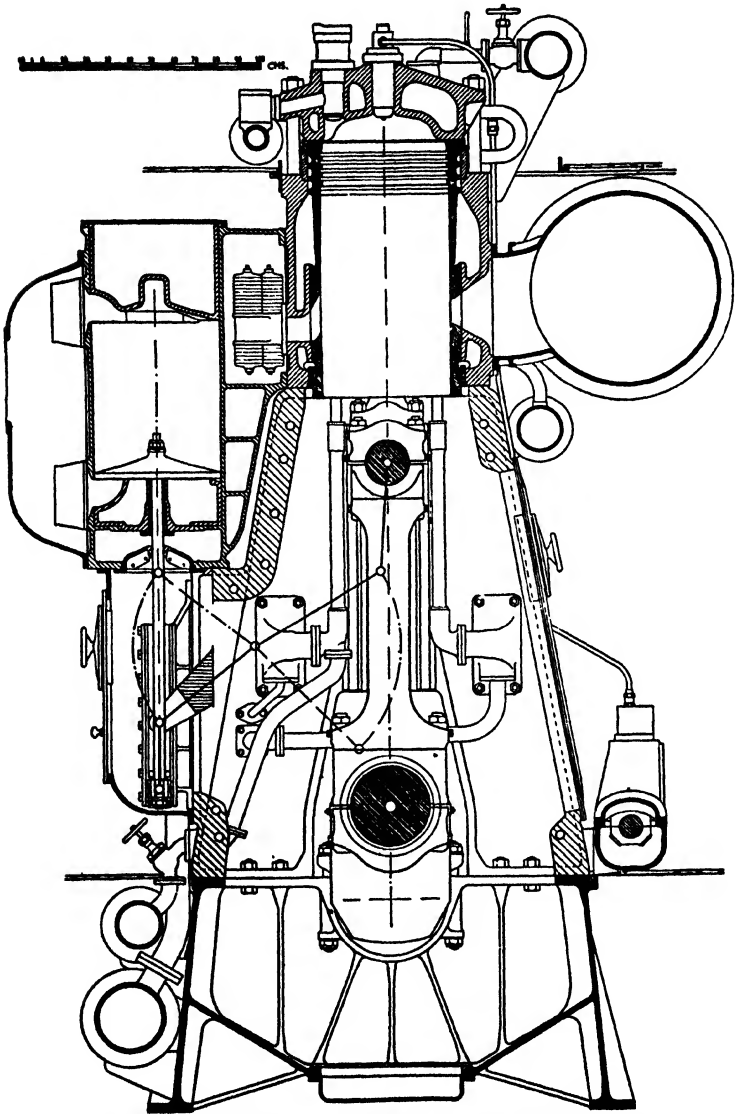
Cross-sectional elevation of Sulzer type two-cycle, single-acting engine installed on *M.S. Prins Albert*. (*British Motor Ship*.)
